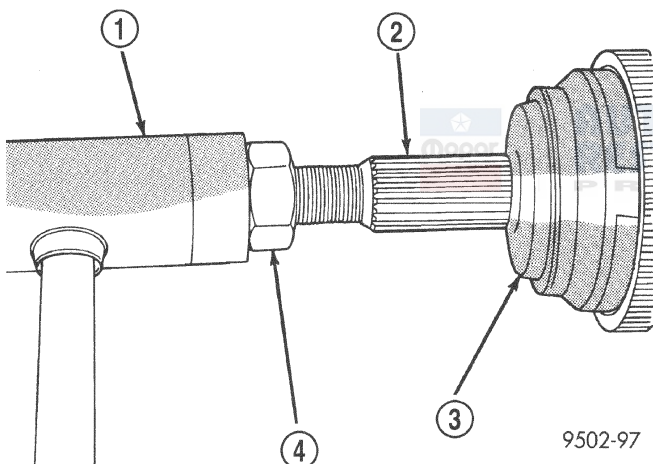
Sealing Boot Installation on Interconnecting Shaft
